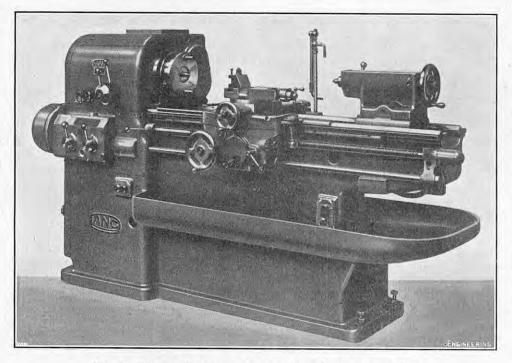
"Junior" Centre Lathe; John Lang & Sons, Ltd.
